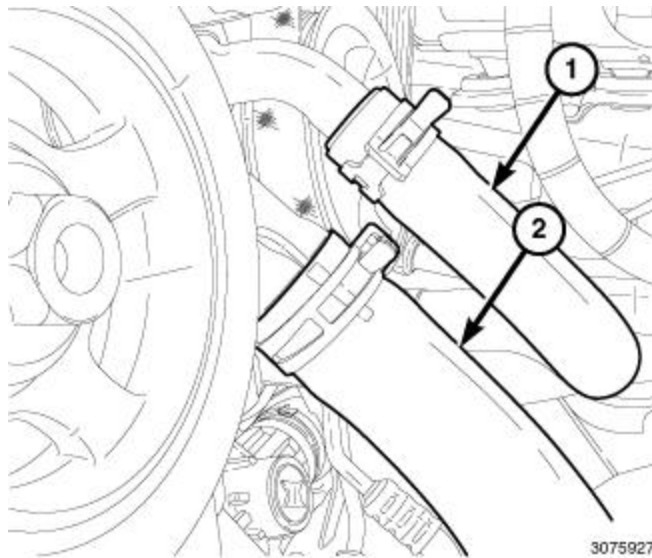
Lower Heater Core Return Hose & Lower Radiator Hose
